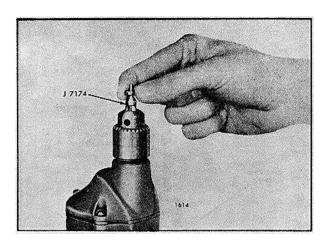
Lapping Edge of Hole in Valve Seat using Tool J 7174
